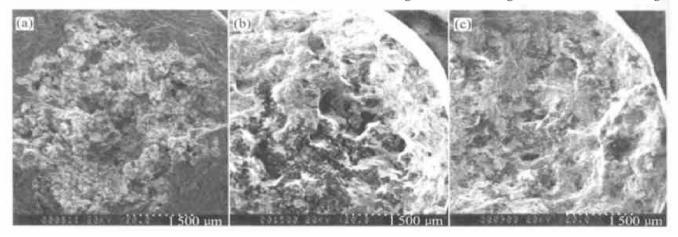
Fracture surfaces of scrap A356 tensile test samples after different cleaning processes (a) -213.9 MPa, 2.40%; (b) -244.0 MPa, 3.93%; (c) -255.0 MPa, 4.17%
